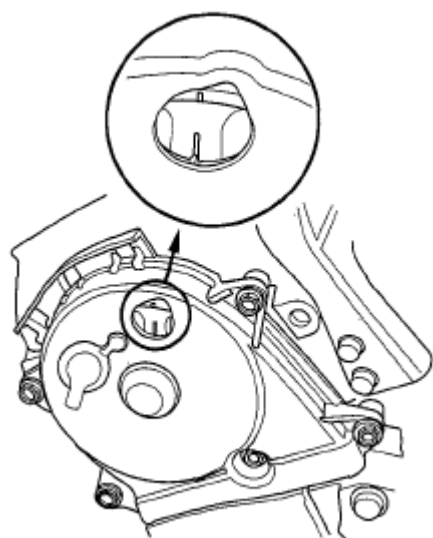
Identifying Camshaft Pulley Marks - Rear
